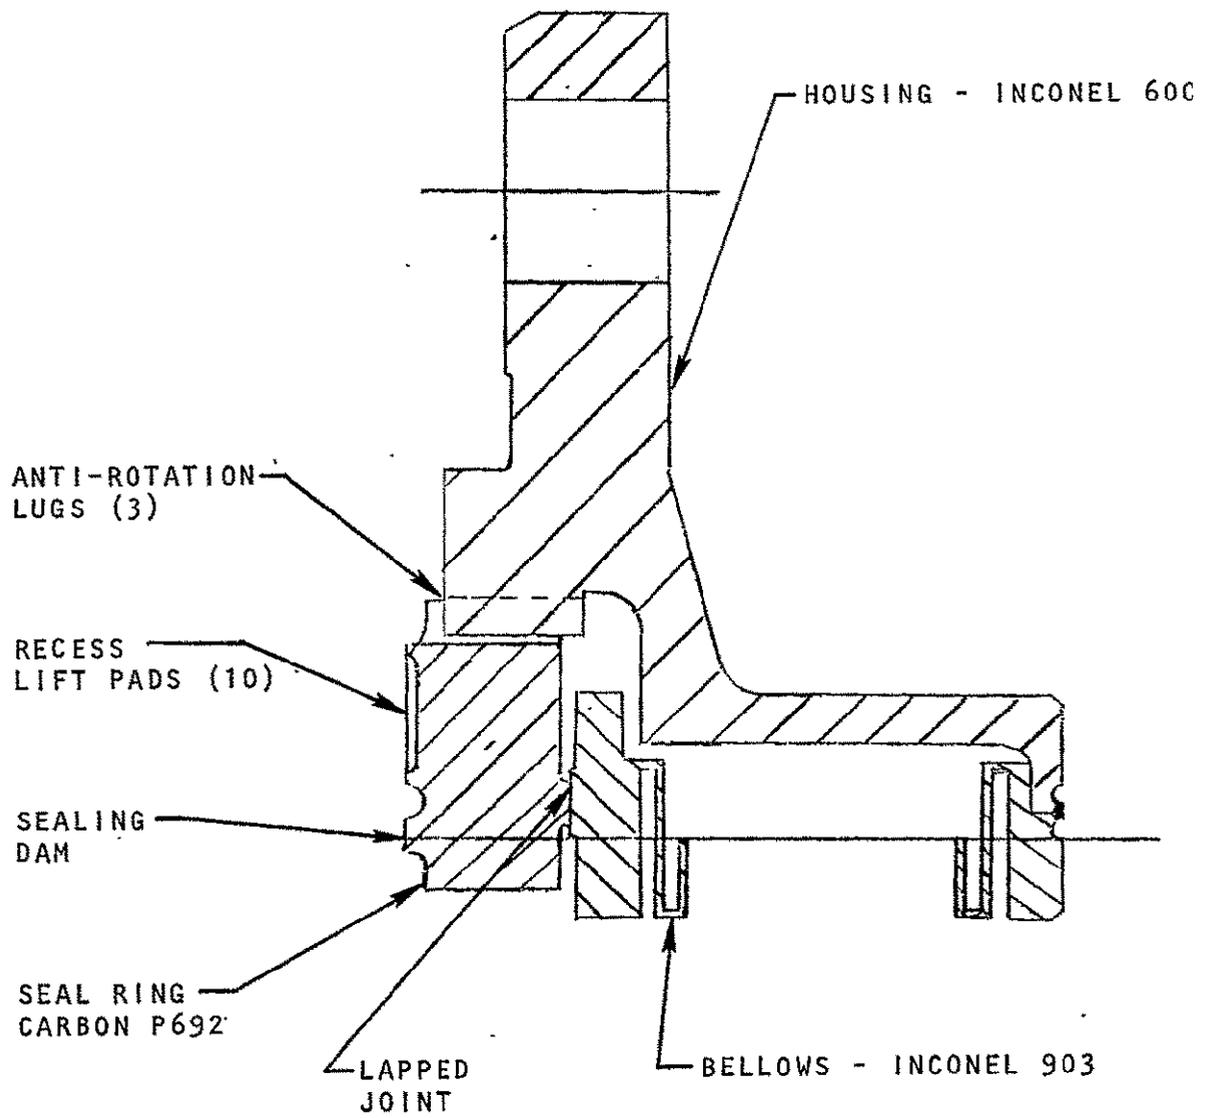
Rayleigh Pad Machined Metal Bellows LOX Seal Final Design Layout
